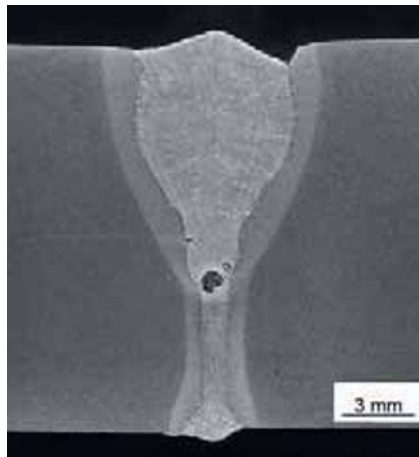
Cross-section of a hybrid welded sample with 0.6 mm gap
